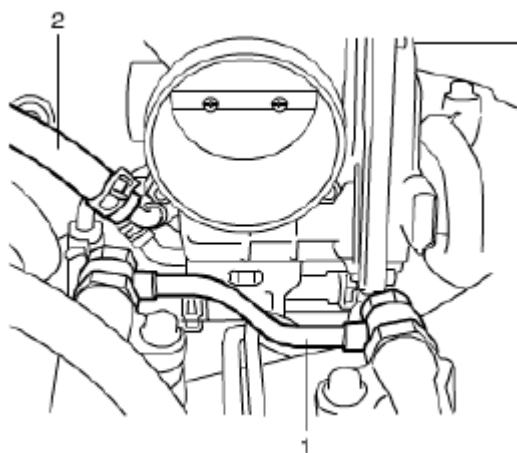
Identifying Intake Air Pipe Surge Tank Pipe & IMT Valve
